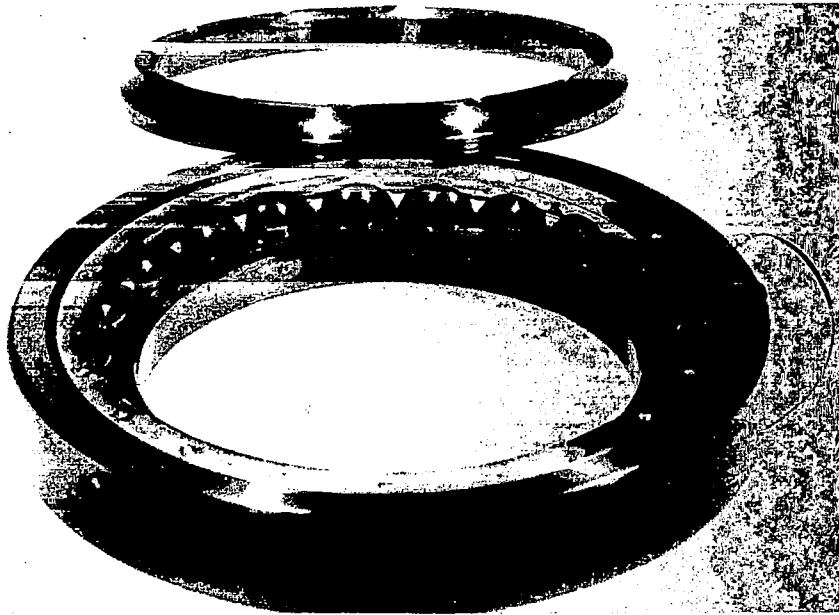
Post-Test Appearance of Drilled-Ball Bearing S/N 2552A-1 Before Disassembly With Unloaded Inner Ring Removed
